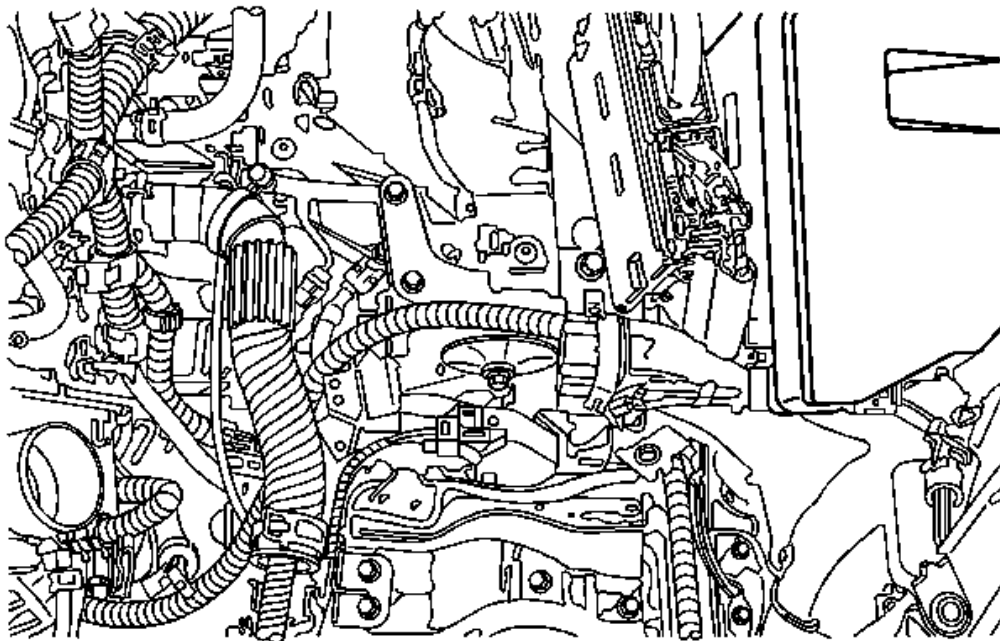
Identifying Engine Block Heater Harness Plug Bundle
